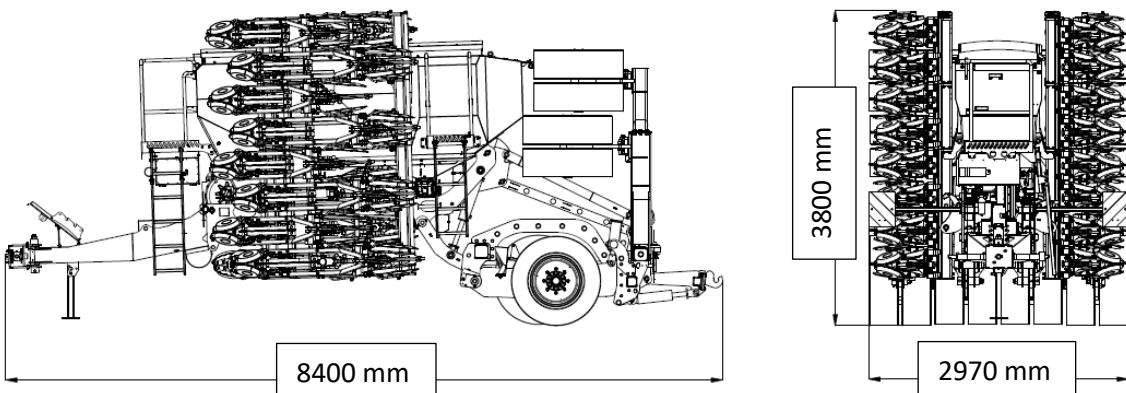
Overall dimensions of the 6 m machine without attachment.
